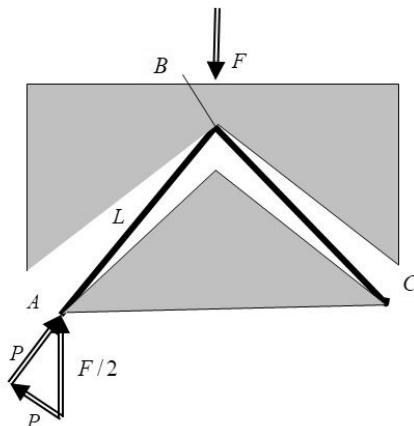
Scheme for acting forces during the formation of a V-shaped workpiece under cramped conditions
